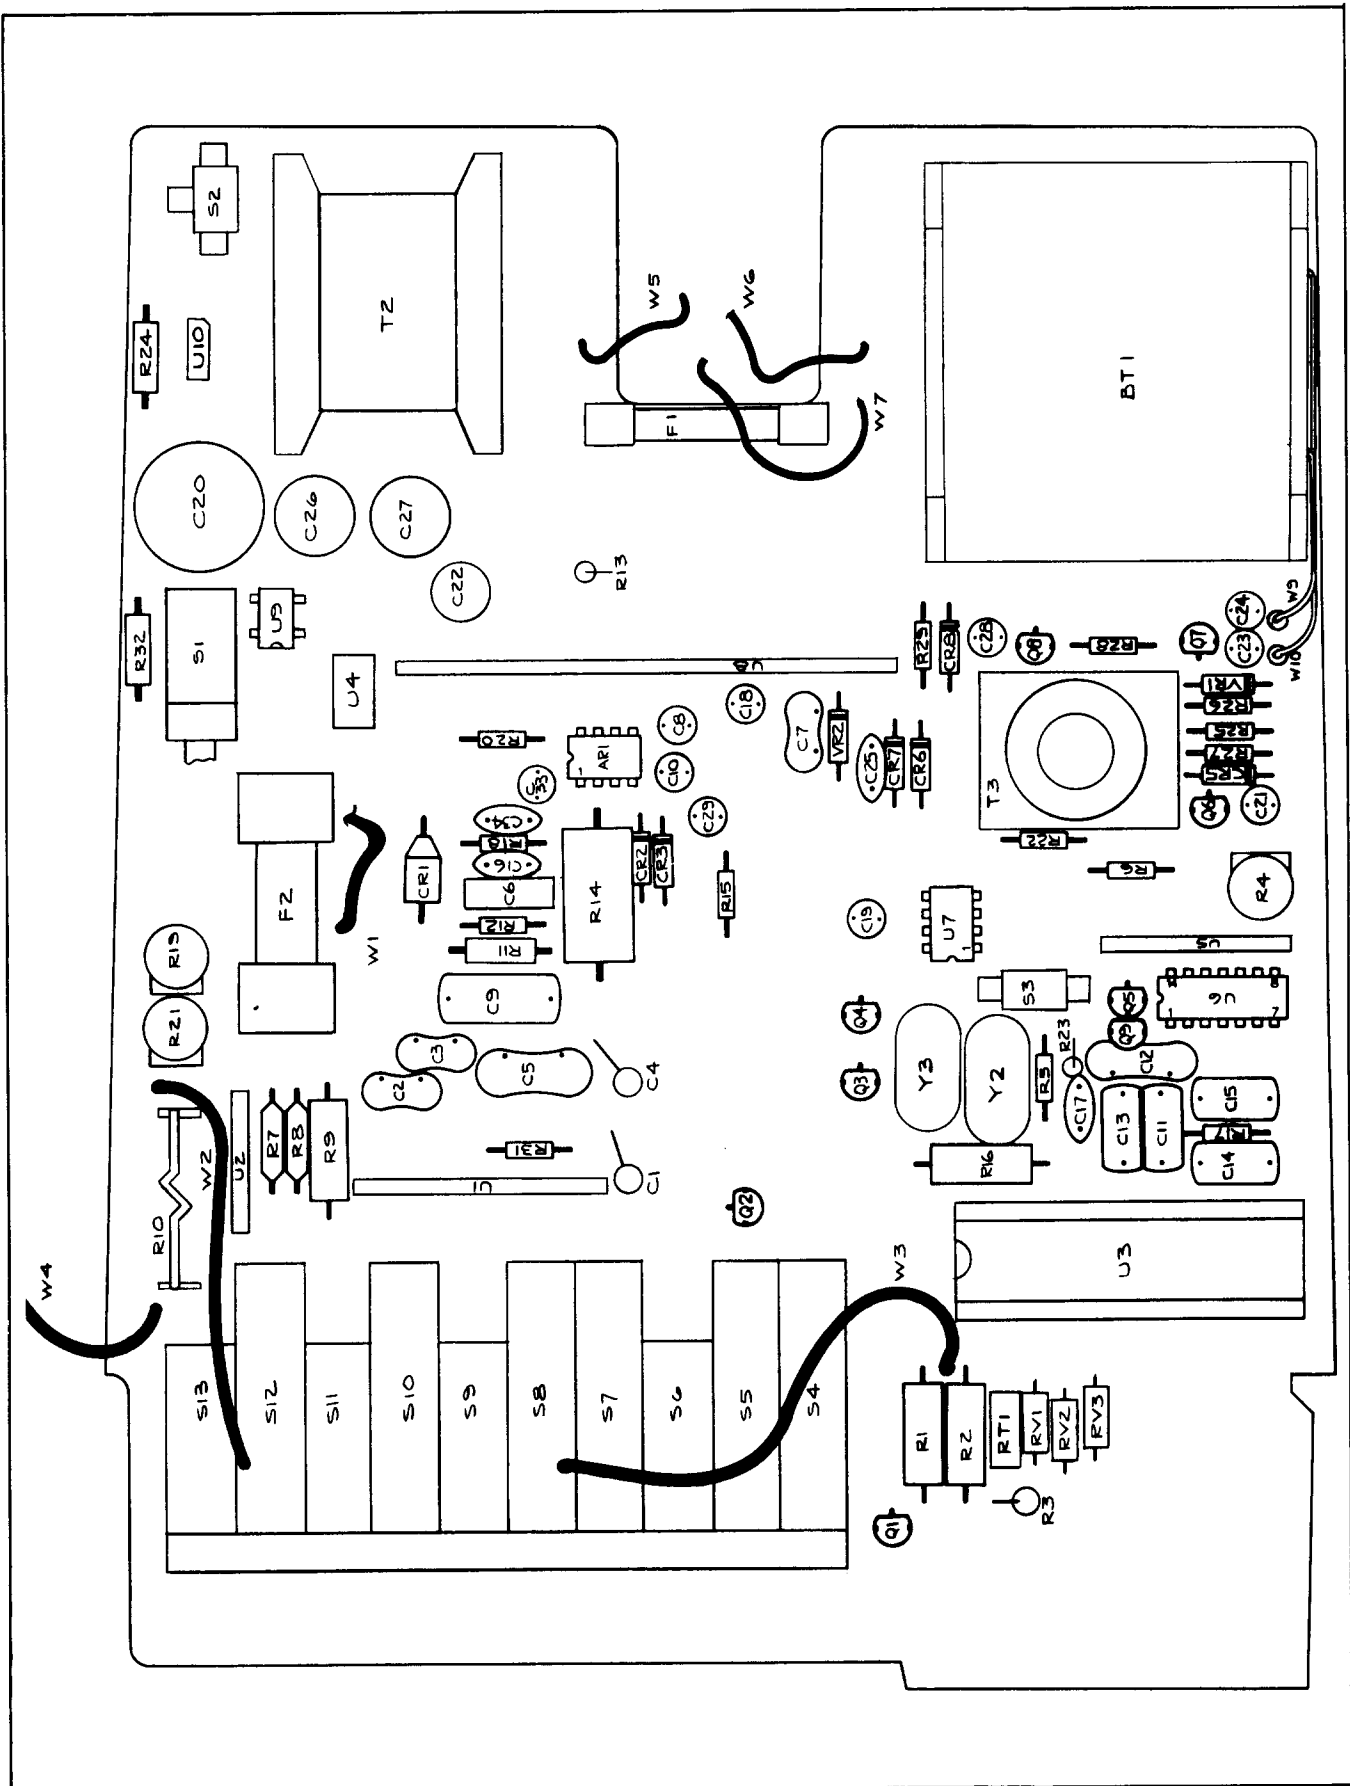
A1 Main PCB Assembly (-01 Option)
